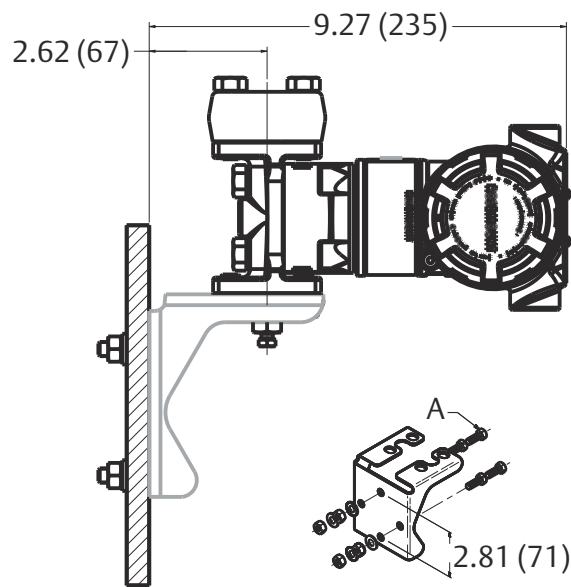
Rosemount 3051C Coplanar with Rosemount 305RT3 3-Valve Traditional Integral Manifold
